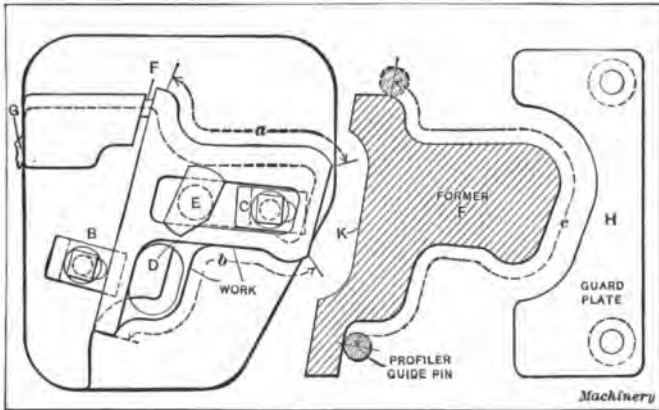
Fixture and Former for Profiling Outside of Automatic Pistol Frame
